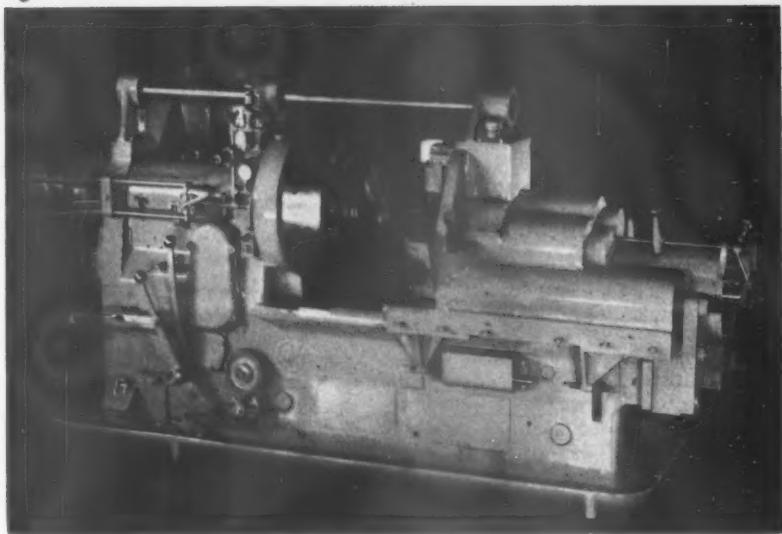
Fig. IX. Gisholt 3D Radial Fly Wheel Machine.
